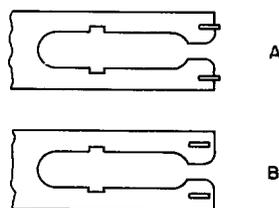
Crosspoint Bifurcated Spring Contacts Used on Crossbar Switches
